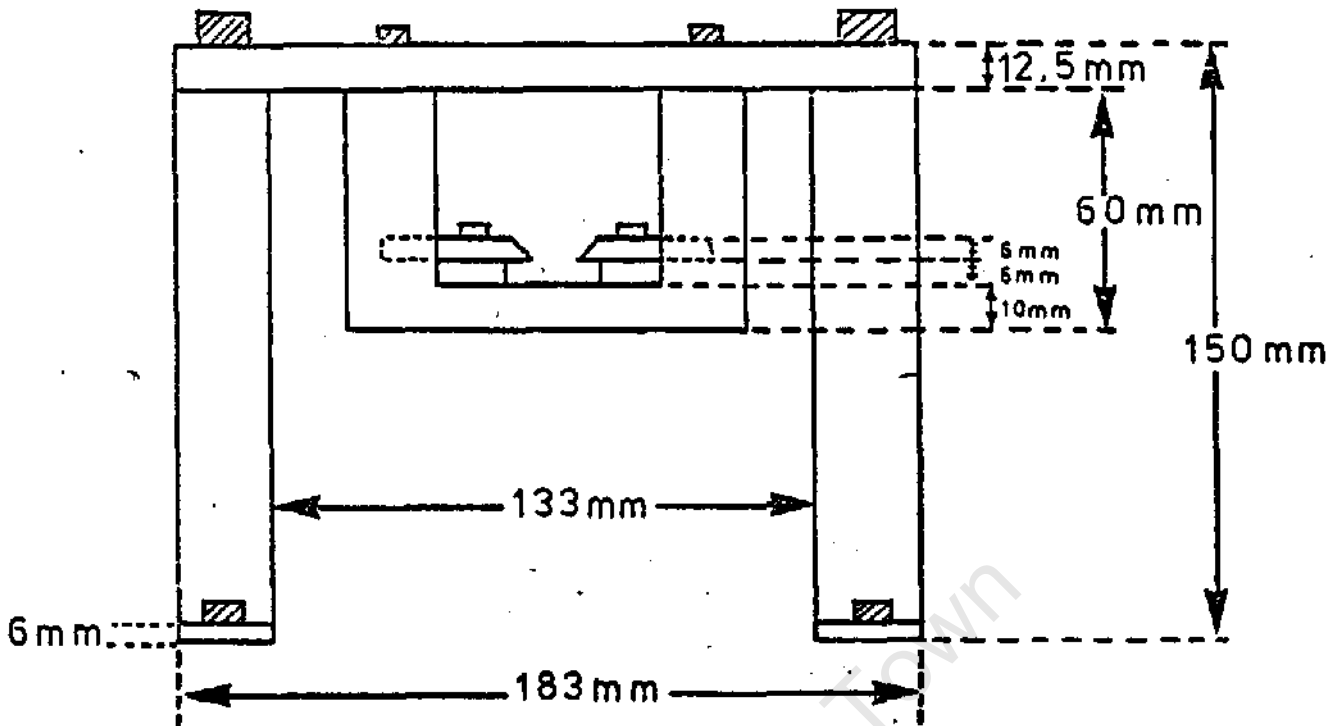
(a) The Specimen Mounting Rig (Elevation)
